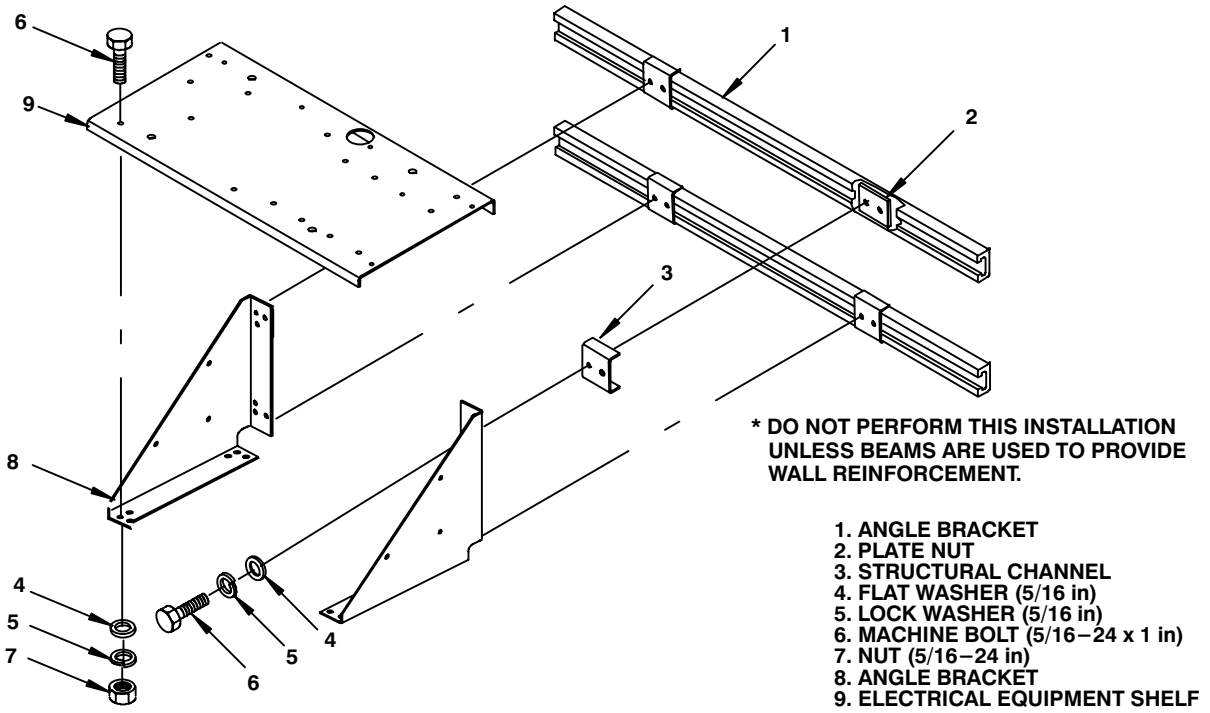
(4). Electrical Equipment Shelf Installation: Alternate Installation C
